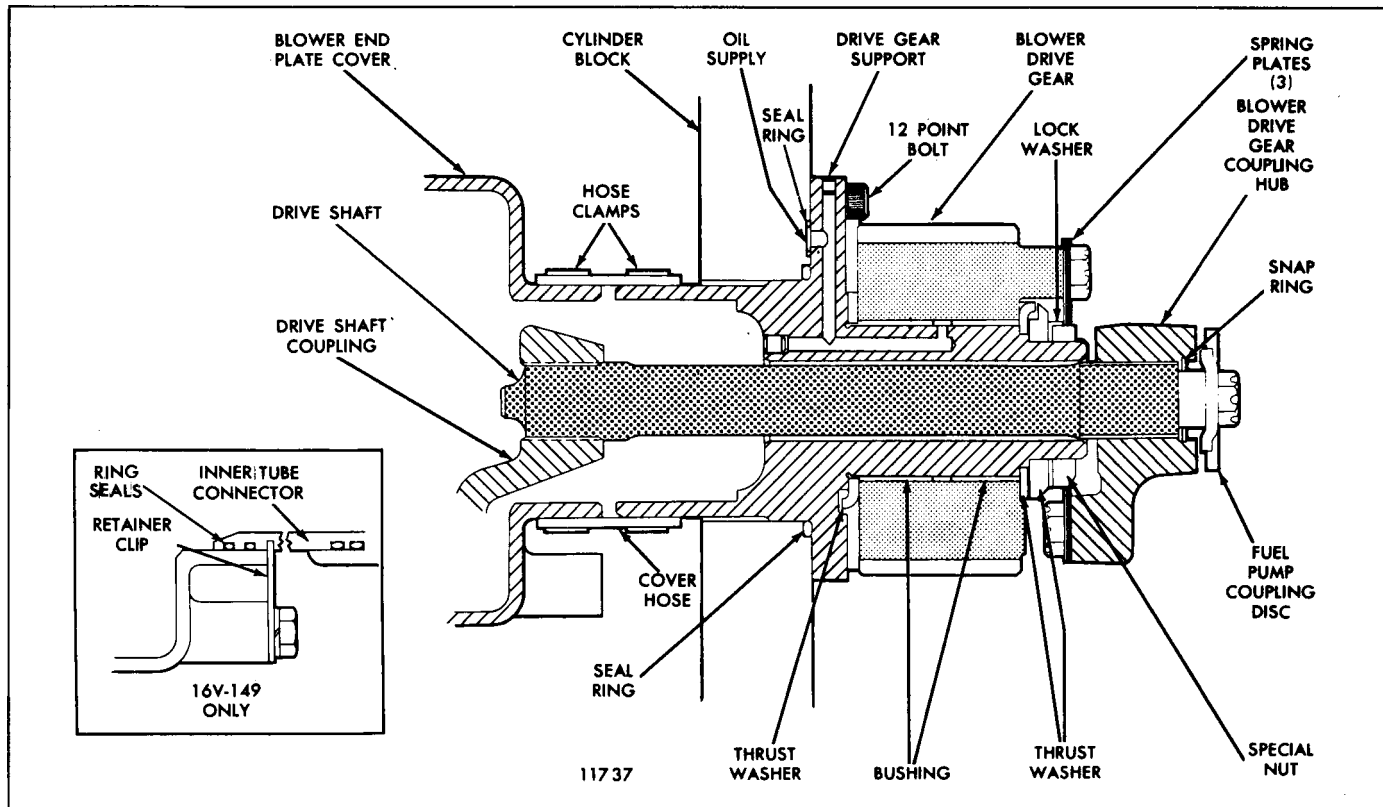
Blower Drive Hub and Gear Assembly (12V-149)
